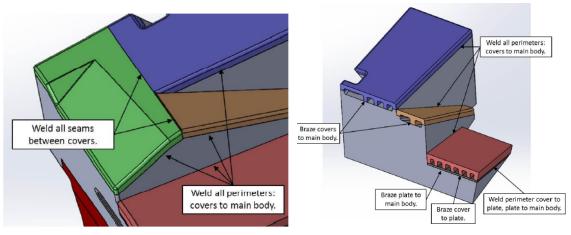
Perimeter seal weld and brazed joints (cut view).
